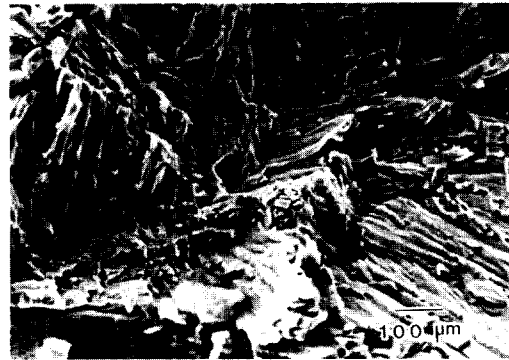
SEM fractographs of SCC in SMA weld metal.
